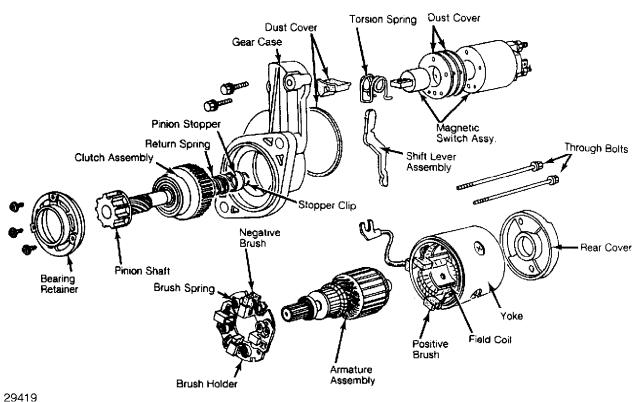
Disassembled View of Typical Hitachi Reduction Gear Starter
